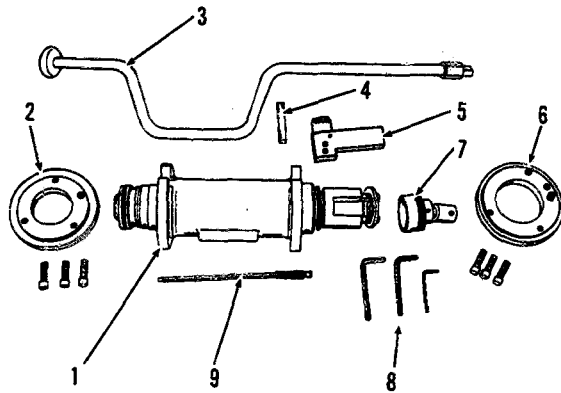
CYLINDER SLEEVE RESEATING TOOL
